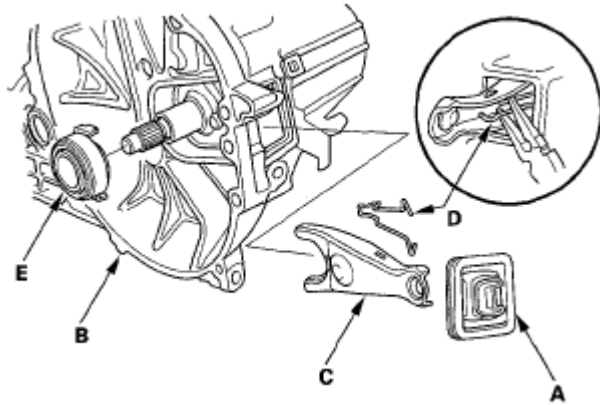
Identifying Release Fork Boot And Clutch Housing
